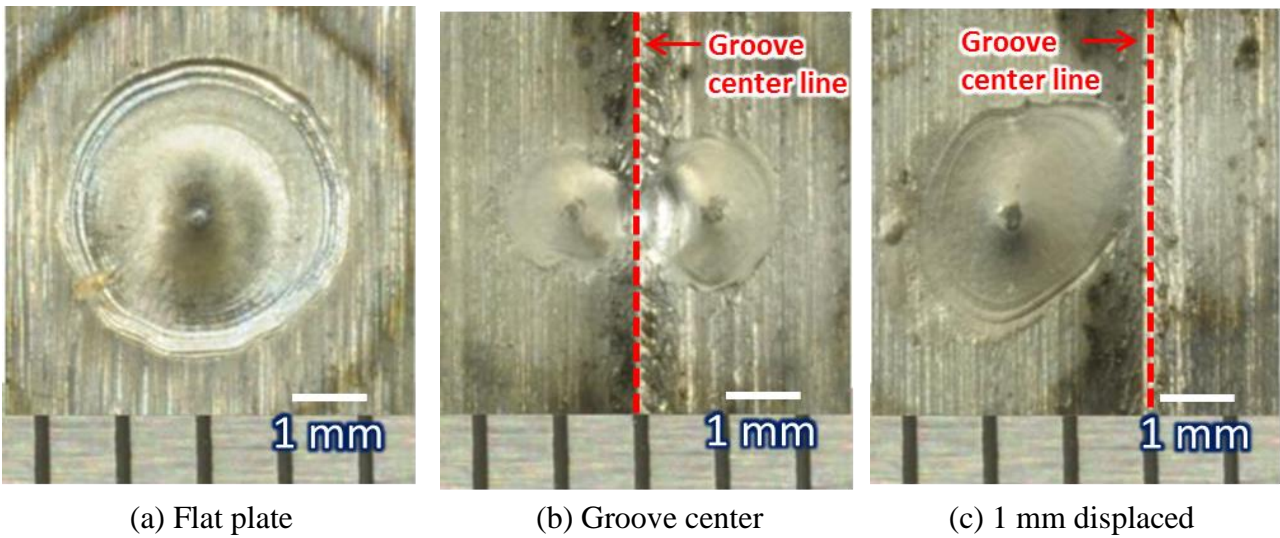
Weld spot appearances formed by TIG arc on flat plate and grooved plate
